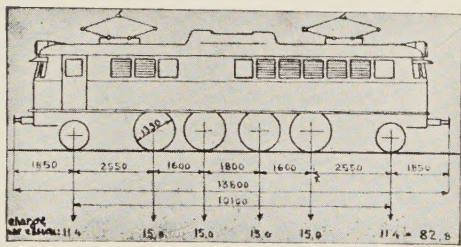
Dimensioned sketch of locomotive in fig. 302.
